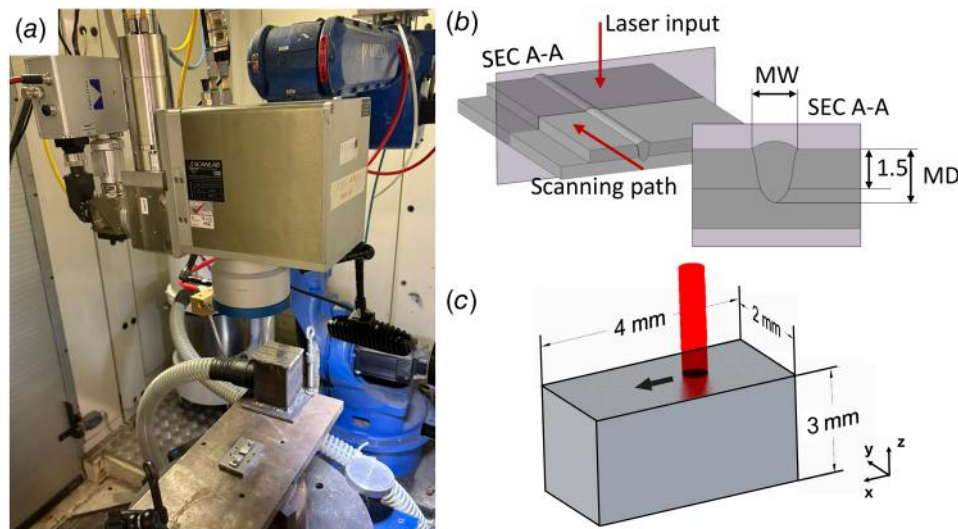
(a) Experimental setup, (b) cross section with weld dimensions, and (c) domain discretized by the PINN
